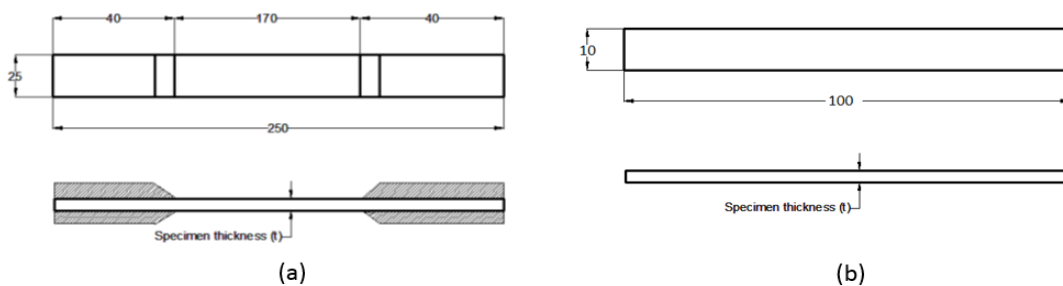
Dimensions test specimens for (a) Tensile Test ASTM D3039, (b) Bending Test ASTM D970.
